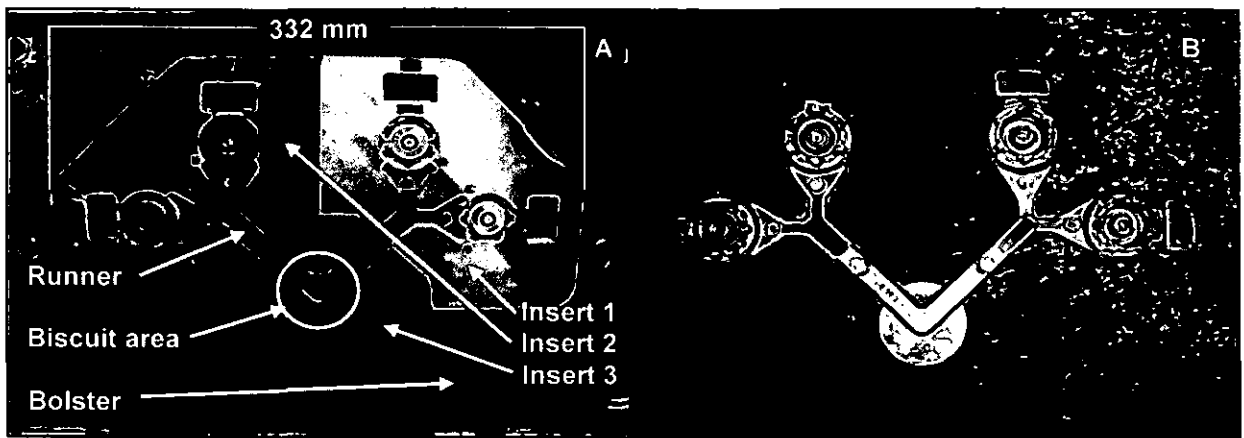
1 (A) Moving half of the tool; (B) Clutch housing casting (Supplied by Dyson and Kemlows)
